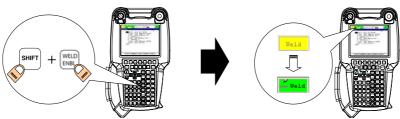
(a) Switch to Weld Enabled
